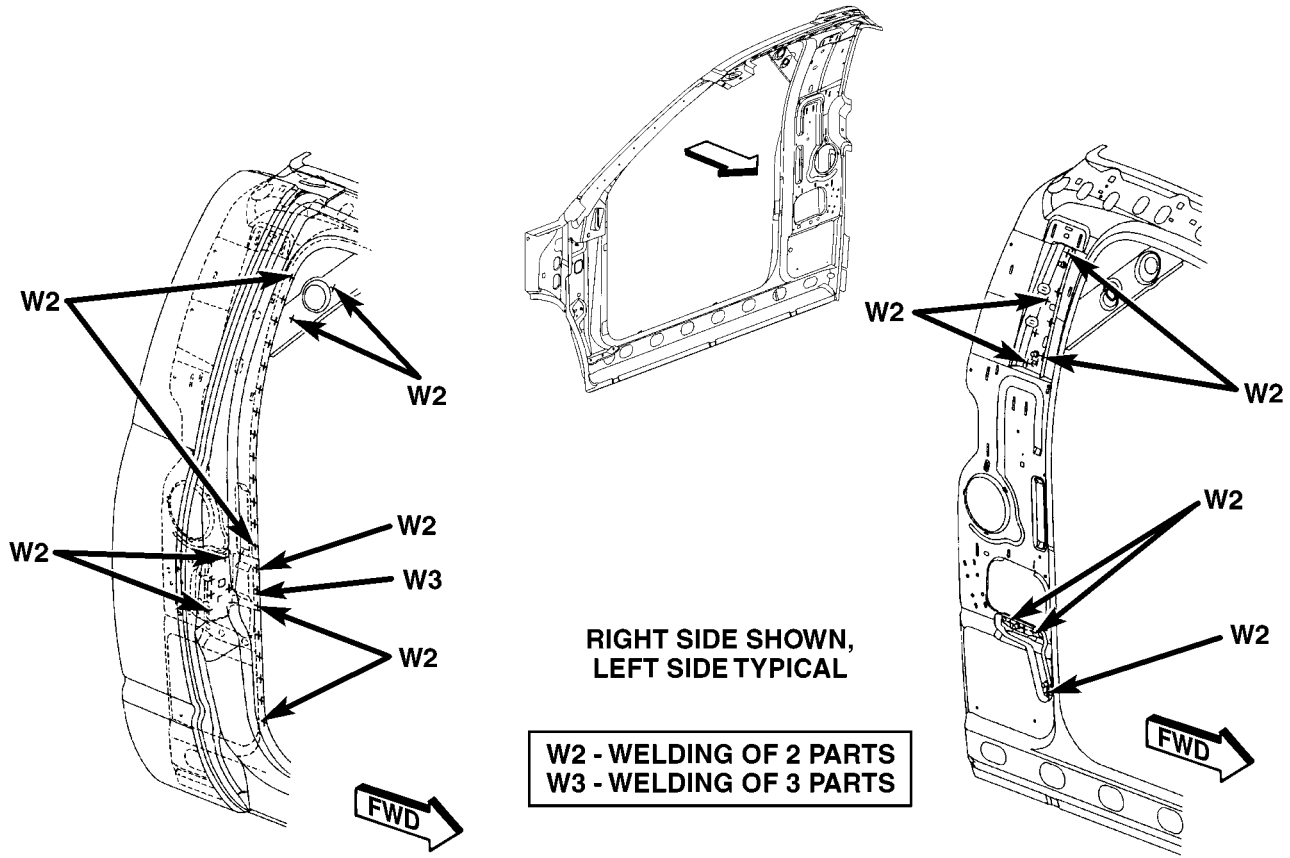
SHOULDER BELT REINFORCEMENT - STANDARD CAB
